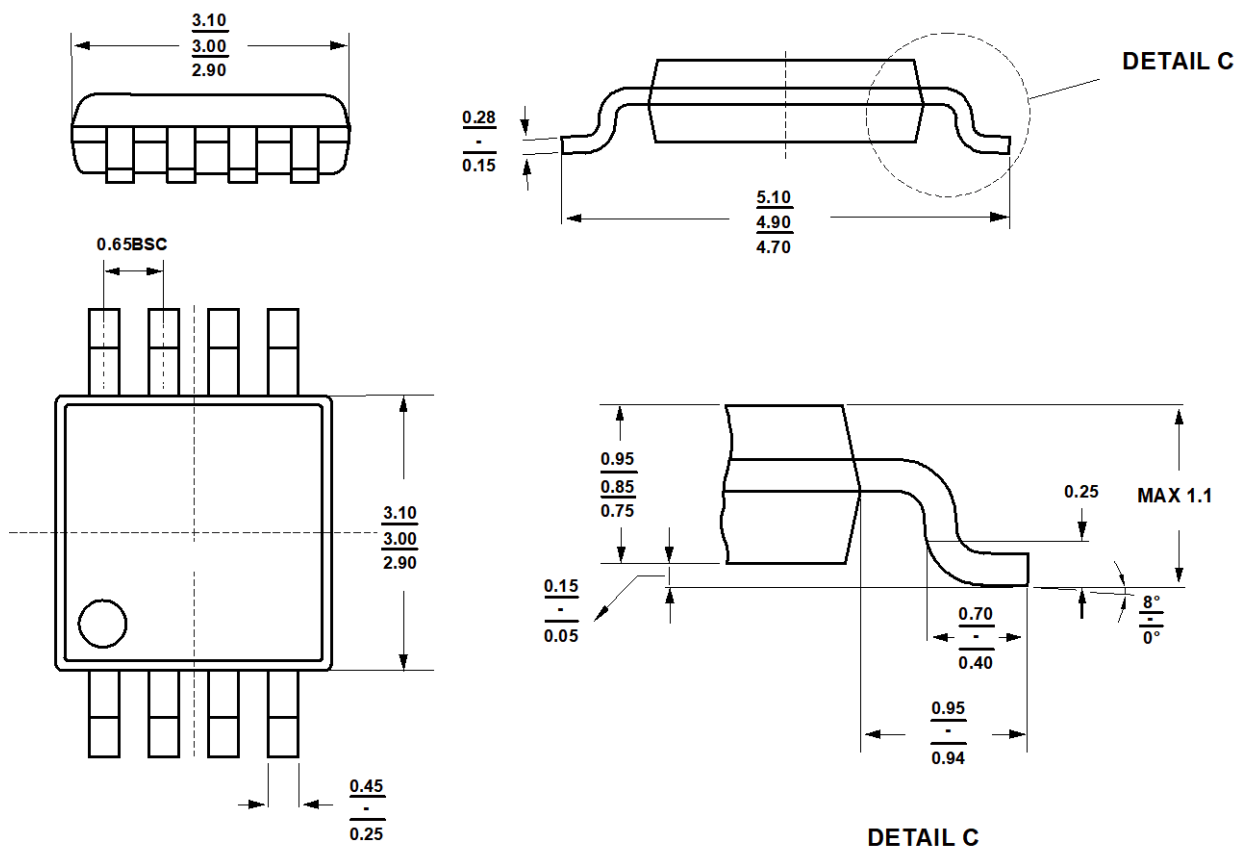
8-Lead MSOP Package Dimensions shown in millimeters
